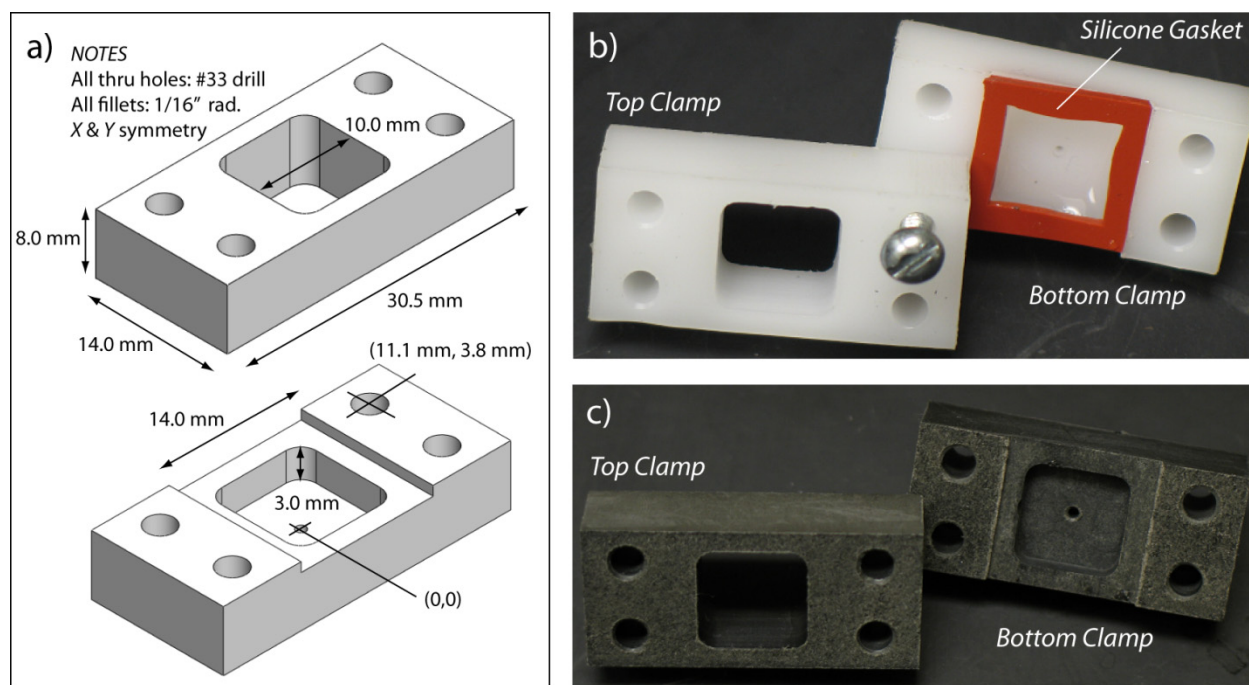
a) Dimensioned schematic of device clamps; b) Photograph of clamps fabricated from Delrin, with seated silicone gasket; c) Photograph of clamps fabricated from Bakelite.
